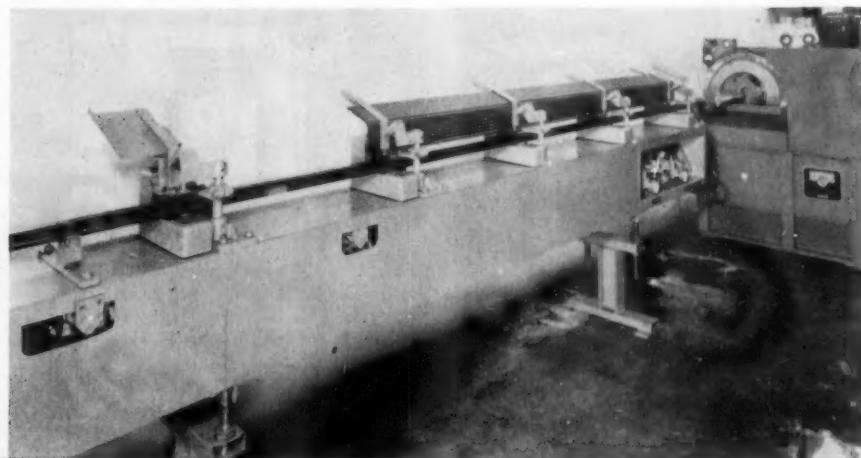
This illustration shows a horizontal type thread rolling machine which is equipped with an automatic bar feeder and a discharge mechanism.
